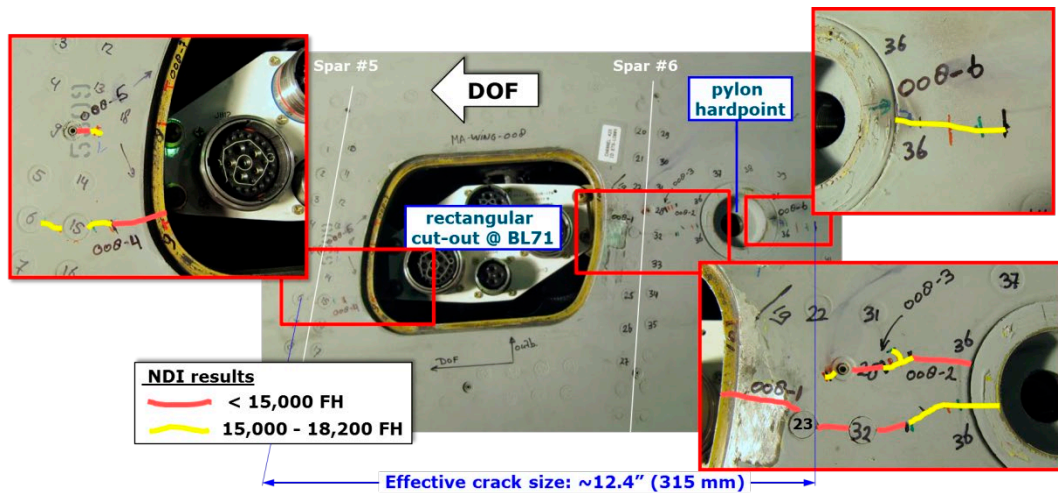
Widespread Fatigue Damage in the area of ASIP CP MA-WING-008: “Lower wing skin, pylon Rectangular Cutout at BL 71, Cutout and Fastener Holes”. A total of ten cracks were present after completion of the durability test. The cracks have been highlighted with red (initial phase) and yellow (final phase).
